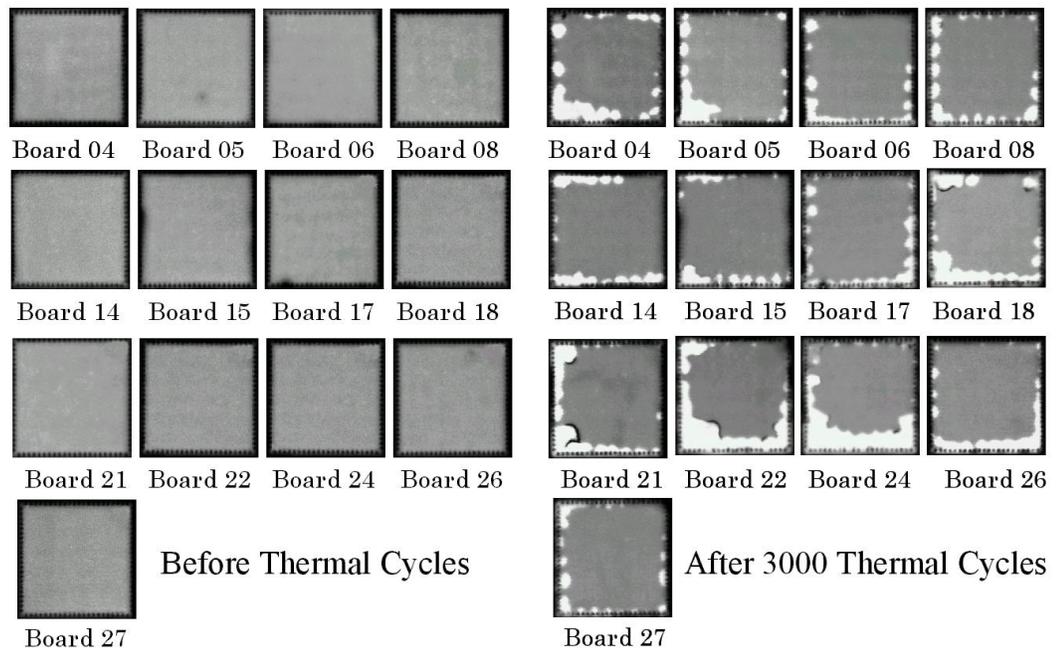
Initial and Final CSAM Images for the Flip Chip Assemblies with Underfill UF1
